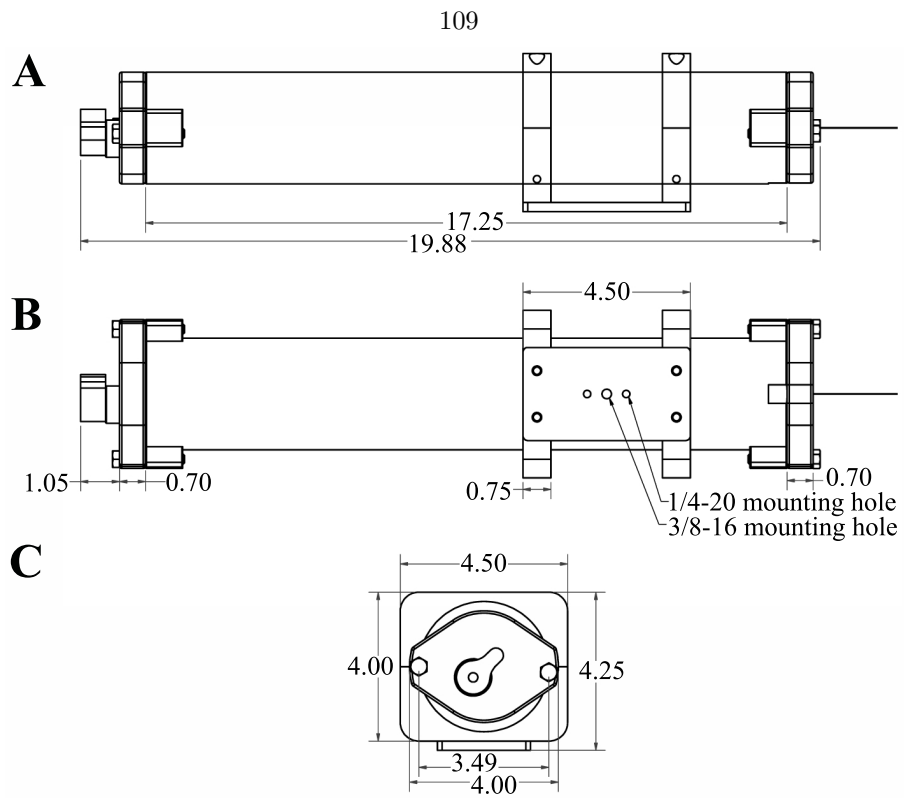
Dimensions of the Hercules laser housing from the (A) side, (B) top, and (C) front views.
